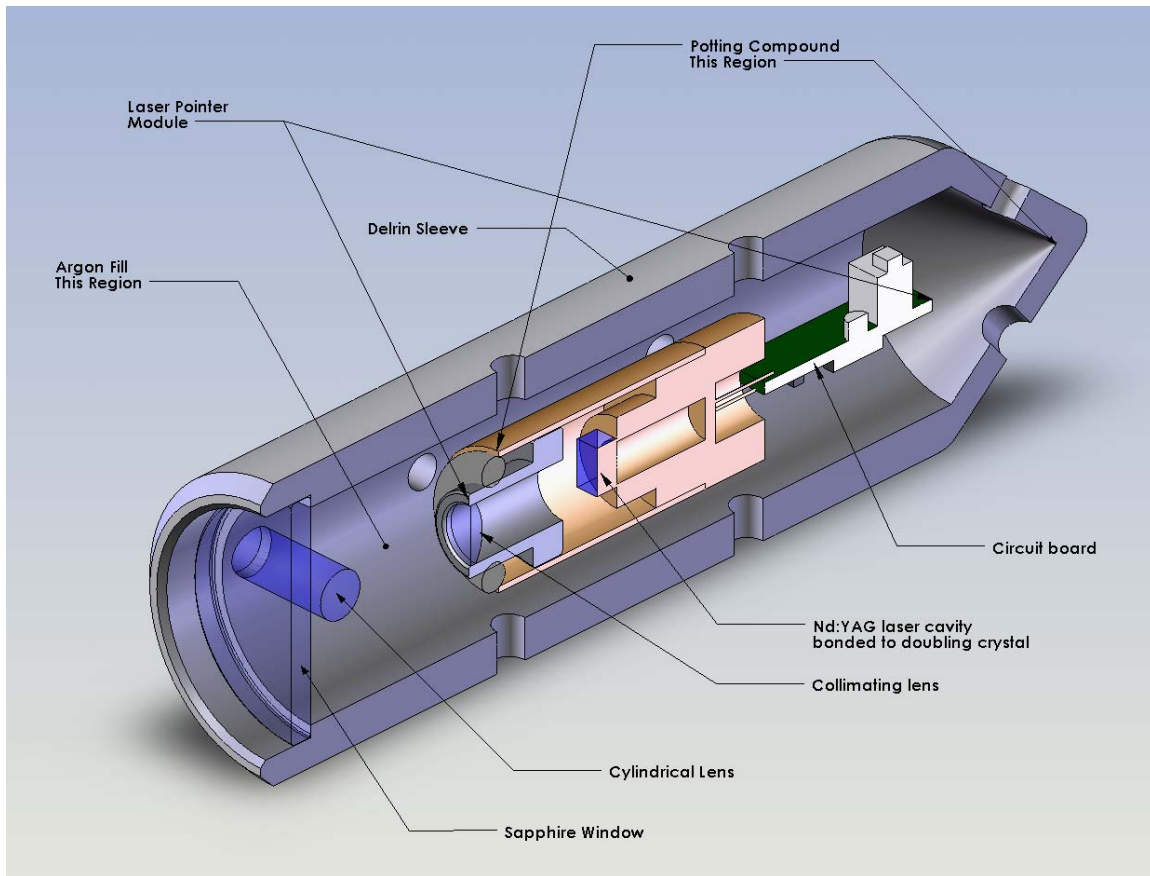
Cutaway view of laser assembly in Delrin sleeve.
